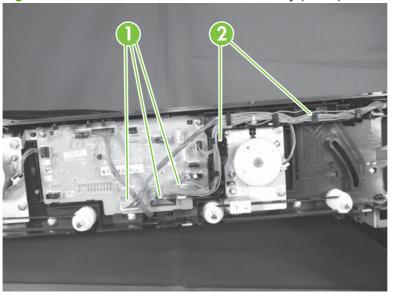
Remove the finisher lock-assembly (2 of 4)
